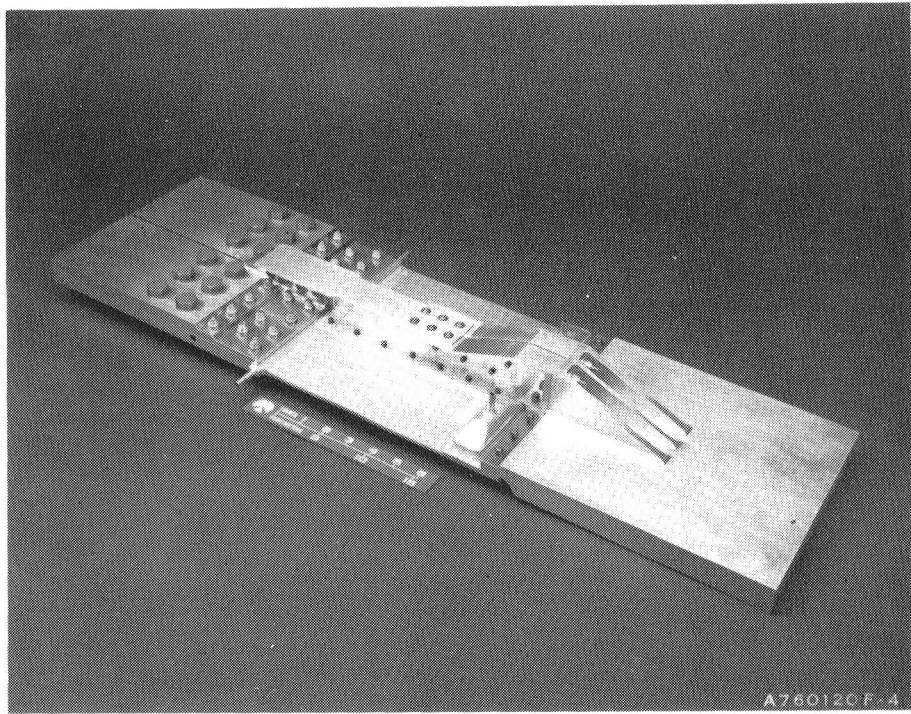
PCS Inboard Side of Completed Fatigue Specimen
